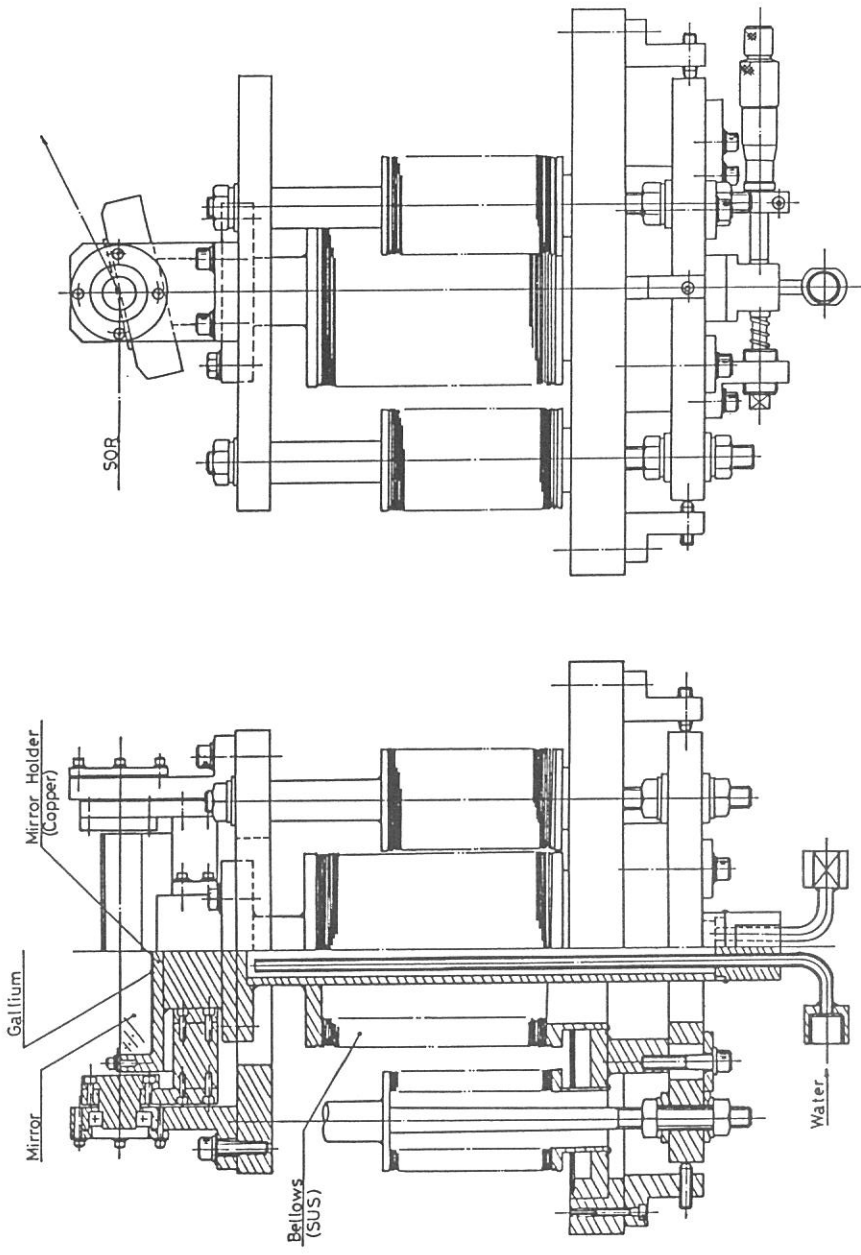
a) front and b) side views of pre-mirror holder at BL7B which can be cooled by water.
